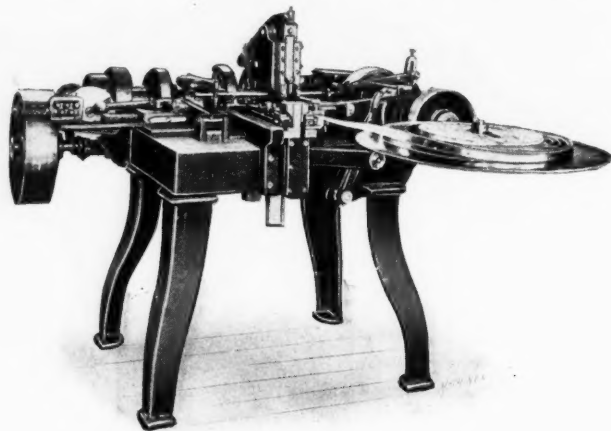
Automatic Machine for Wire Bending and Ferruling
